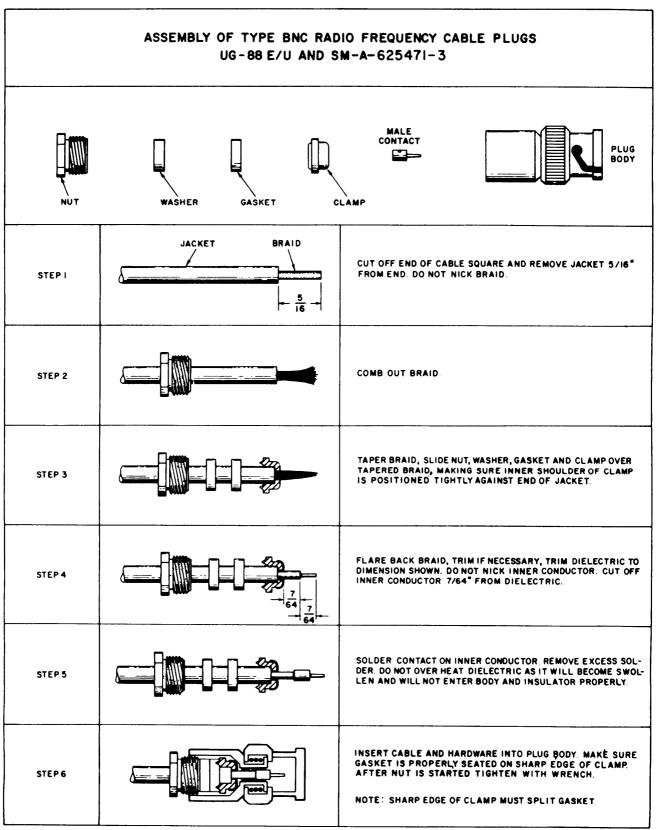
Assembly instructions for type BNC RF cable connectors.
